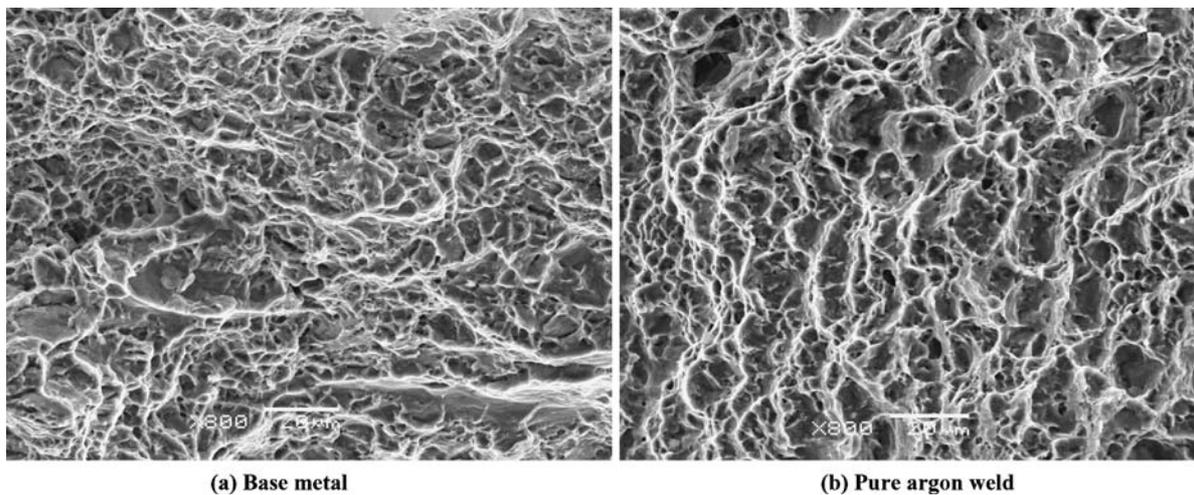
Fracture surfaces of (a) base metal and (b) weld made with pure argon shielding gas.
